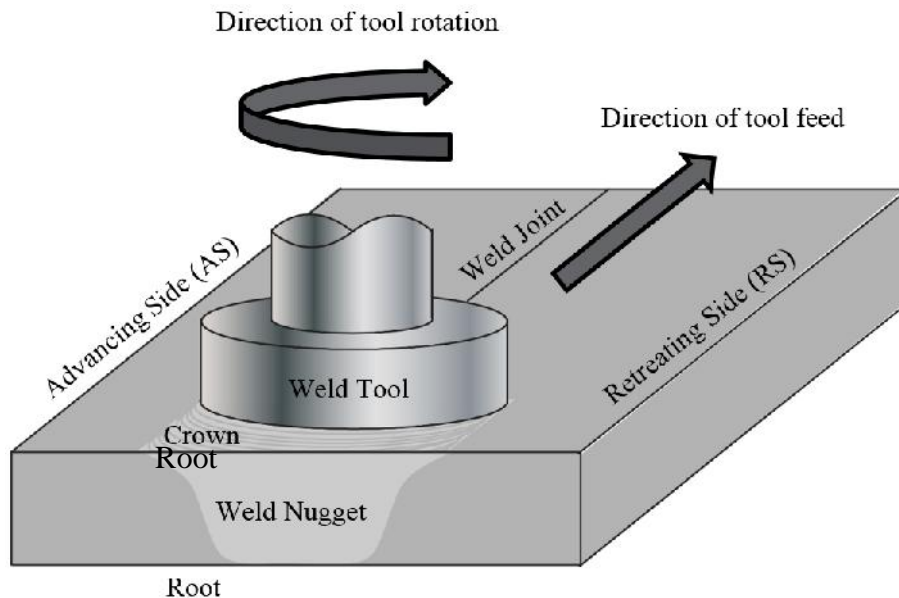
Conventional FSW terminology showing the tool during a weld.
